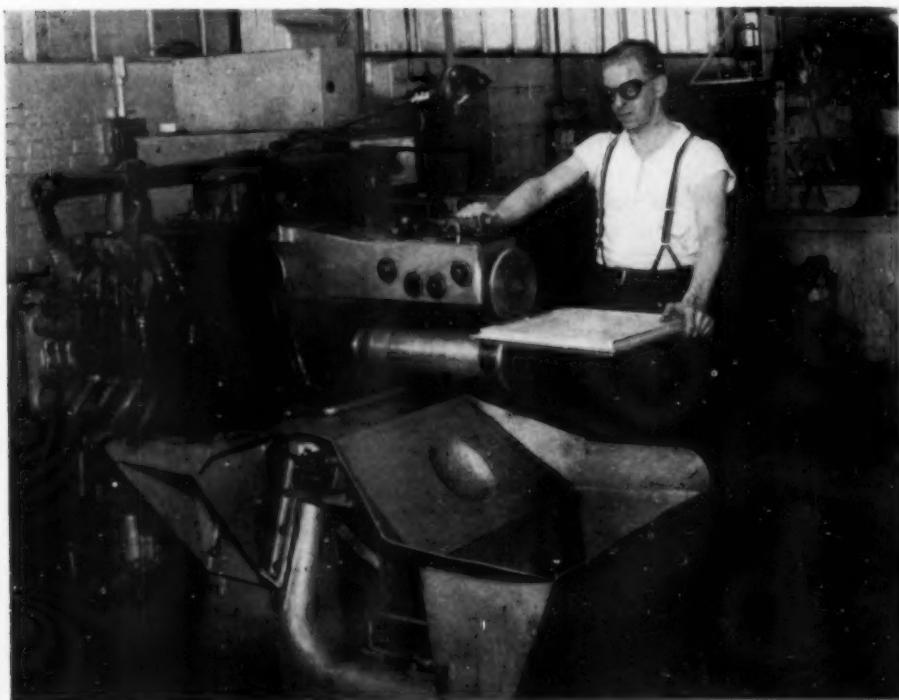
Seam welding a milk cooler plate. The electrodes on the seam welder are two copper wheels, the bottom being the driver, the top the idler. The electrodes are cooled by a stream of water descending from the lower wheel.
